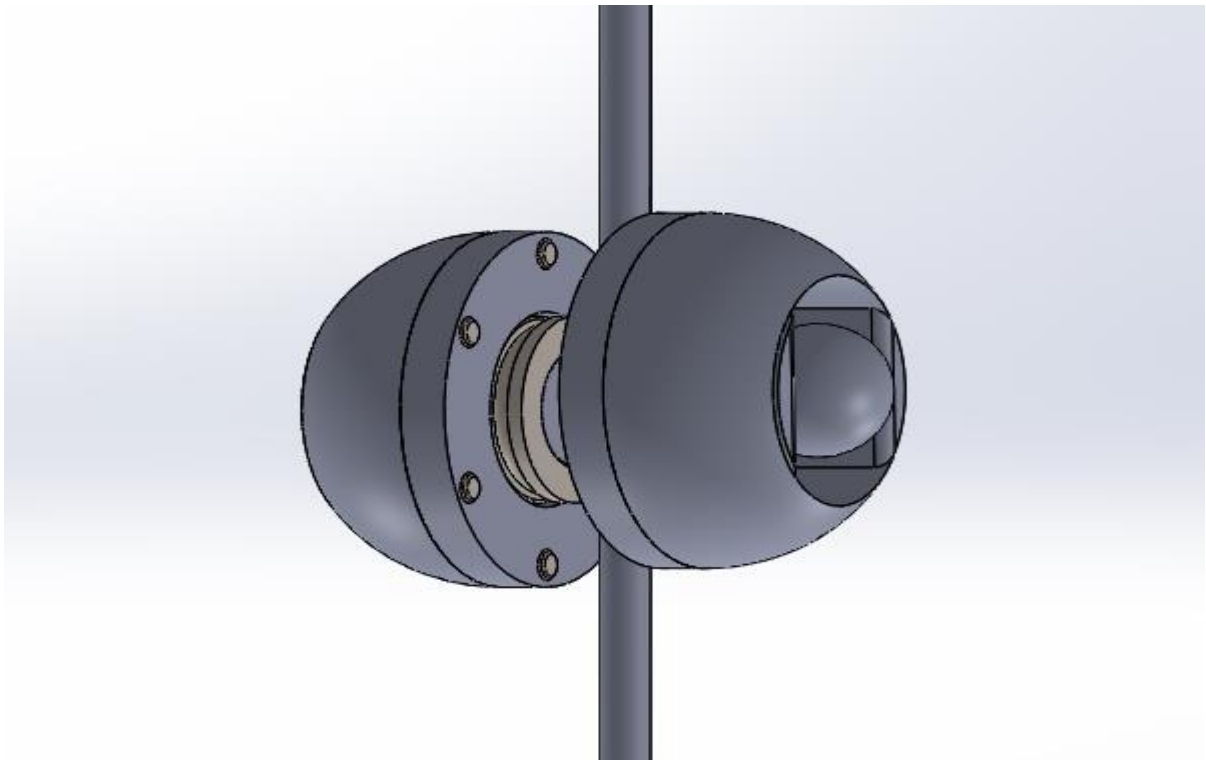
CAD Model of Prototype I of Wheel (Side View)
